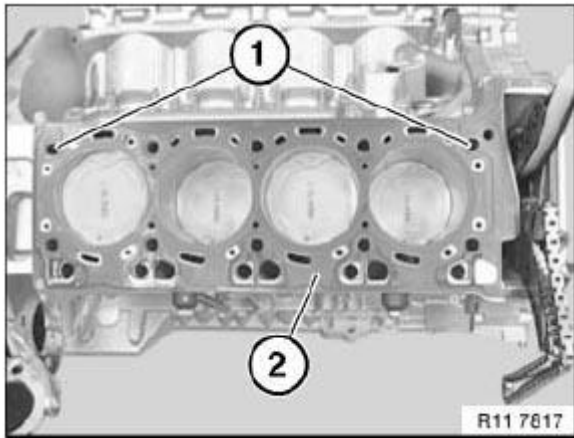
Identifying Cylinder Head Gasket And Dowel Sleeves
